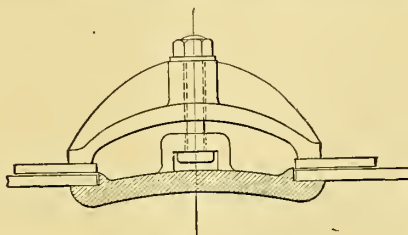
MANHOLE REINFORCED WITH STEEL LINER PLATE.
